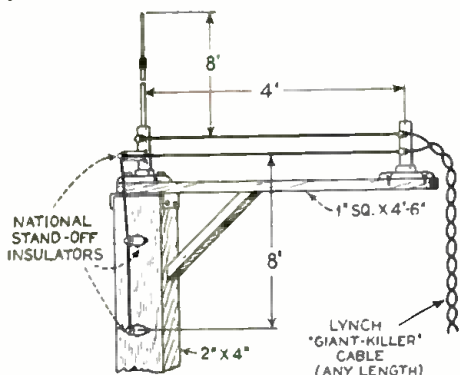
Is a vertical assembly which is identical electrically to the assembly shown in Fig. 2.
